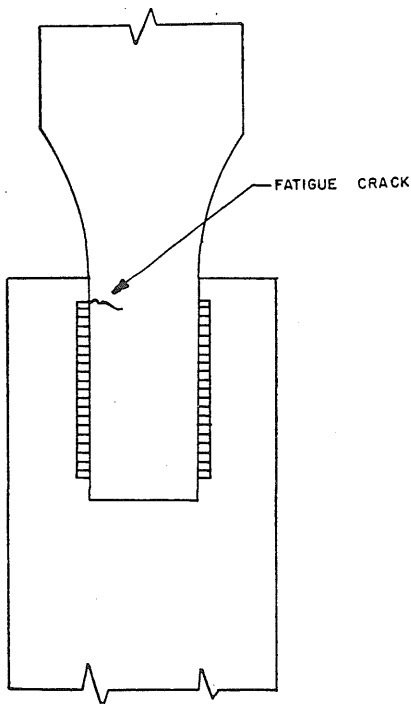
Sketch of location of fatigue failure in longitudinal fillet-welded
